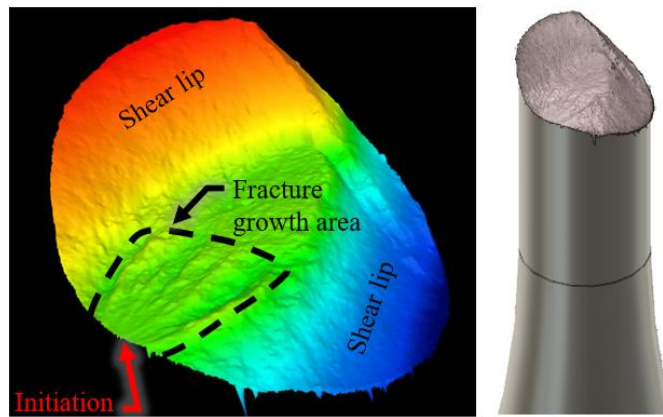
Typical fracture surface topography displayed by tested specimens. On the left the fracture surface topography is presented in detail. On the right, the surface is superimposed on a CAD image of a fatigue specimen.
